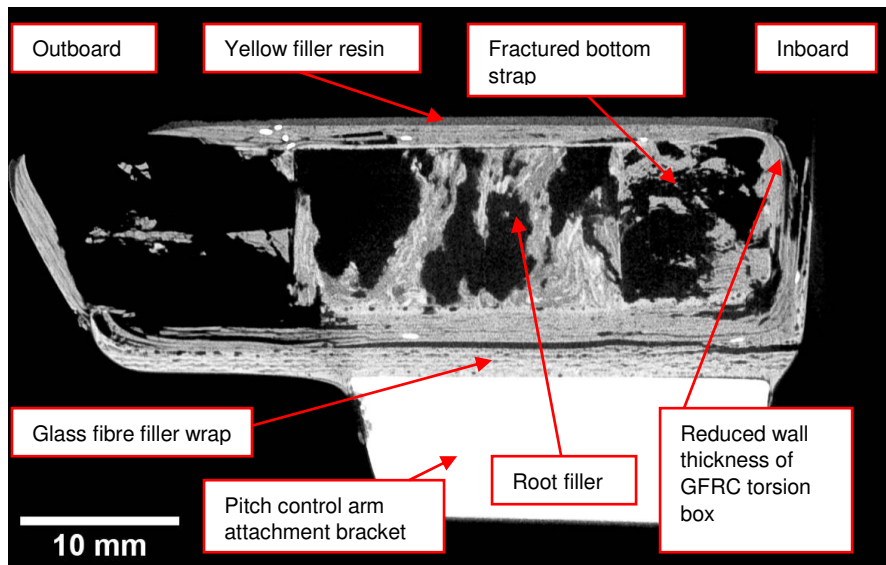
X-ray tomography image showing a plan-view slice through the fractured trailing edge arm of the White blade, fracture zone approximately 4.1 mm below the top of the pitch control arm horn
